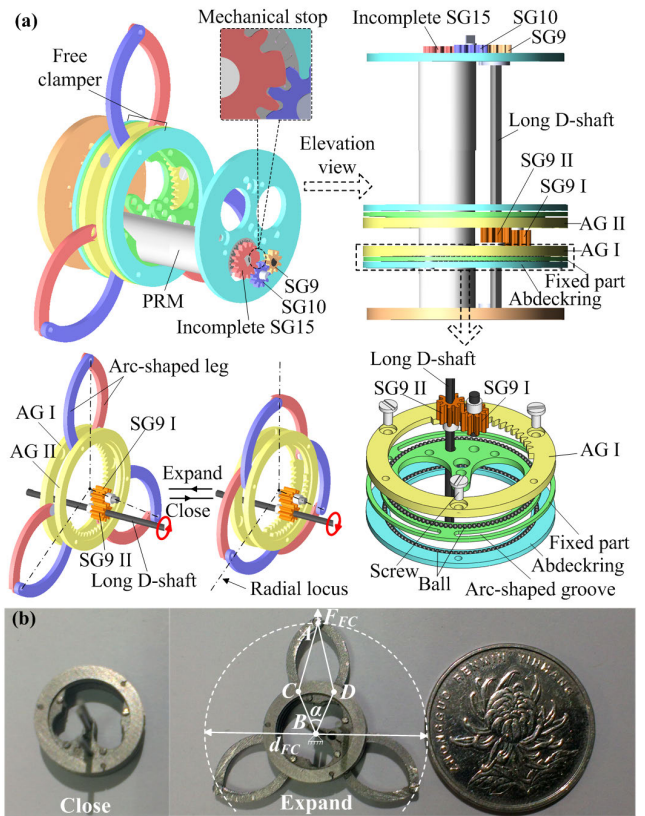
(a) Mechanical design of the free clumper. (b) The assembled prototype.
